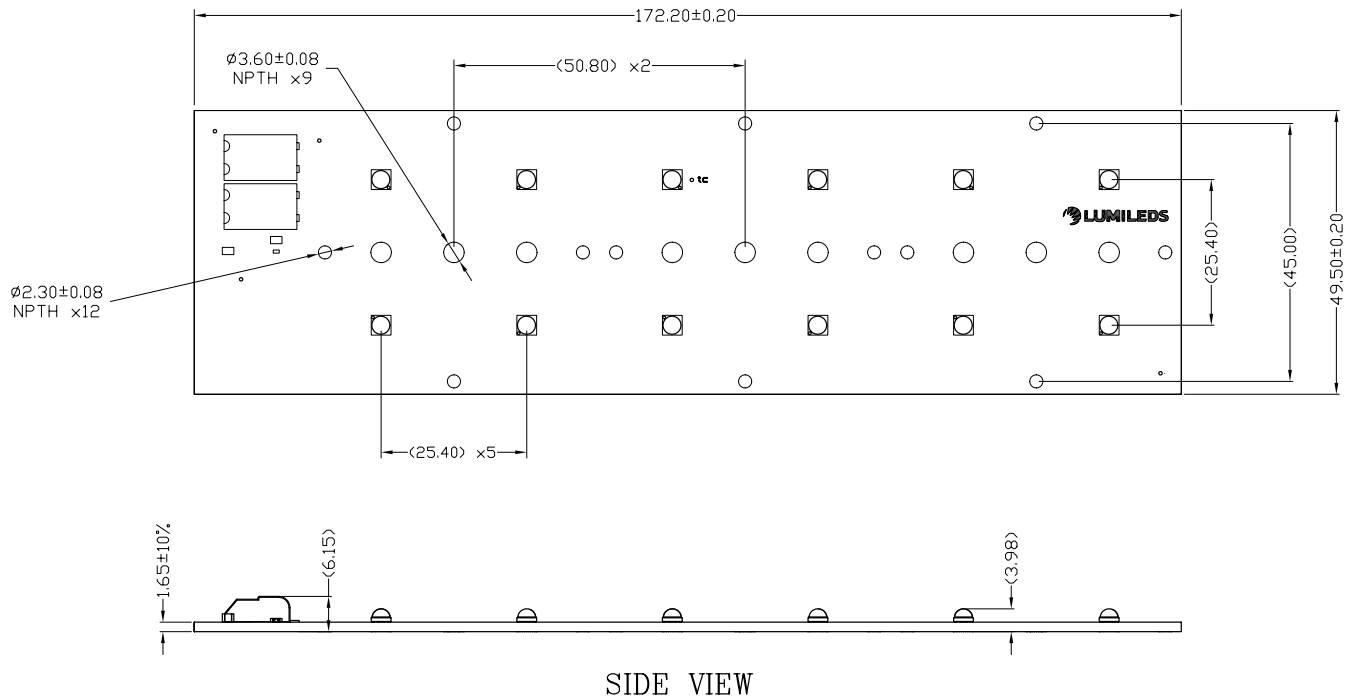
Mechanical dimensions for L213-xxxx012MDE001.
